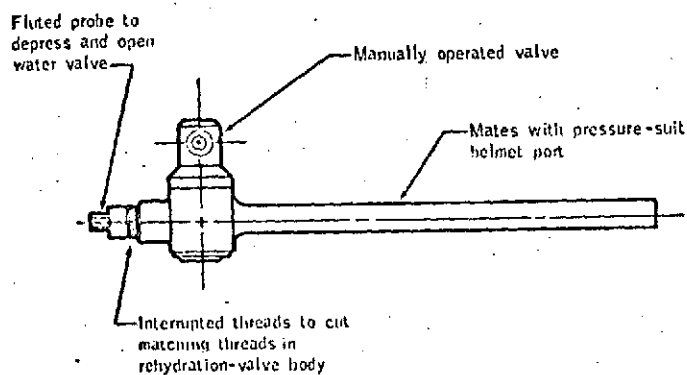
Pressure suit penetration tube with valve adapter inserted into food package rehydration valve.
